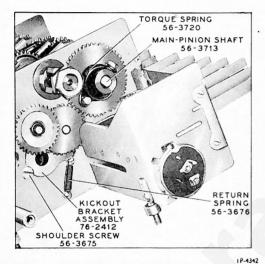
MOTOR GEAR TRAIN AND KICKOUT BRACKET
